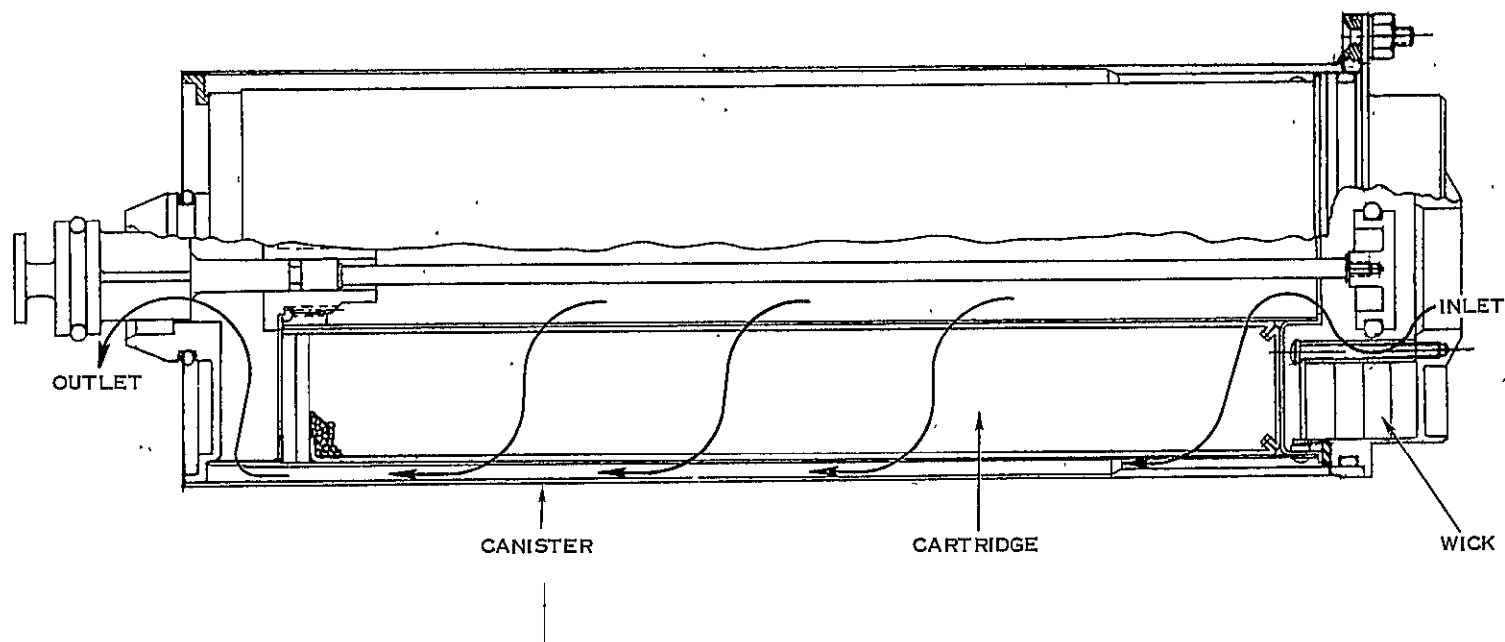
CARTRIDGE/CANISTER ASSEMBLY
